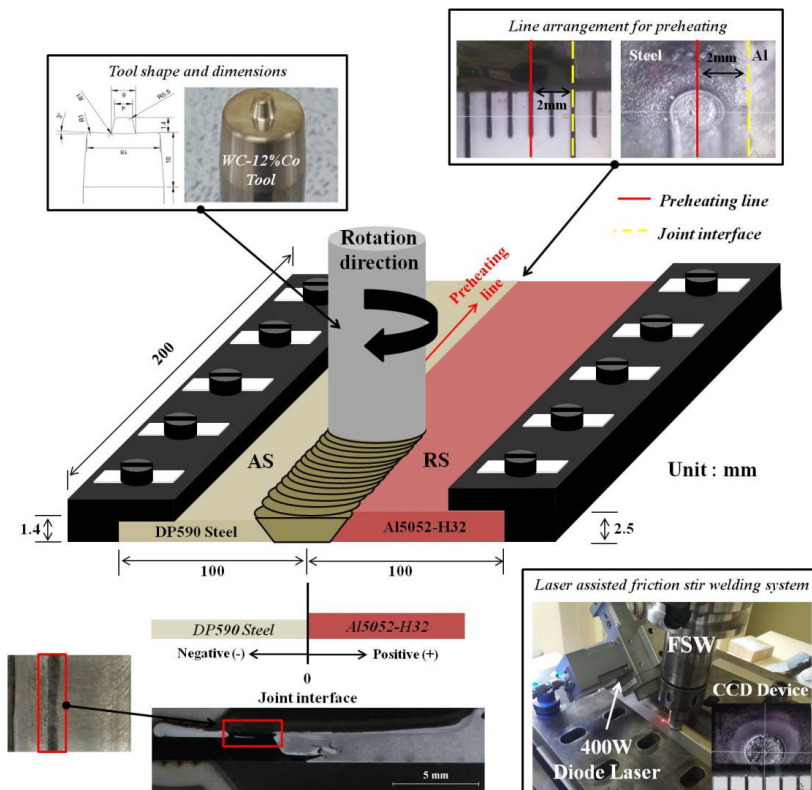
Schematics of experimental set-up of laser assisted friction stir welding system adopted with charge-coupled device (CCD)
